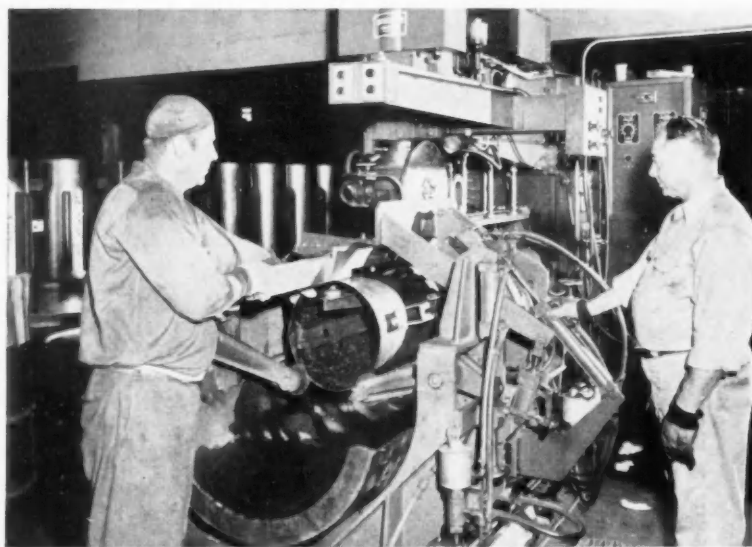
After tank is loaded in automatic fixture, operator inserts first pair of "U" shaped fins in welding position. (Two brackets mounted on side of tank were joined in previous projection welding operations.)
